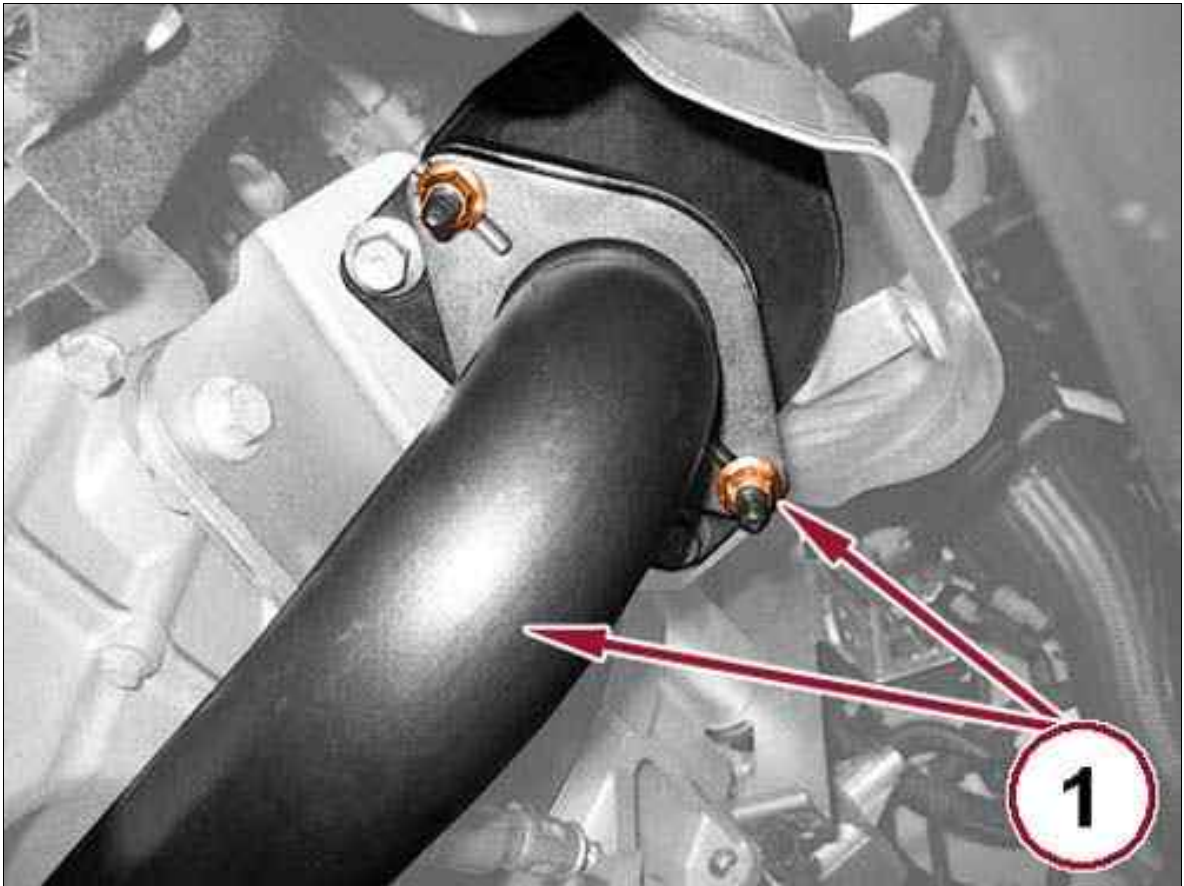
Front Exhaust Pipe Support Bracket Bolts & Exhaust Pipe Support Bracket Bolt
